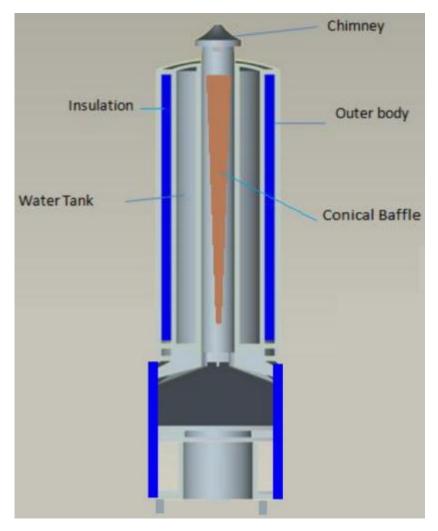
CAD model of backup system incorporating hot water storage tank
